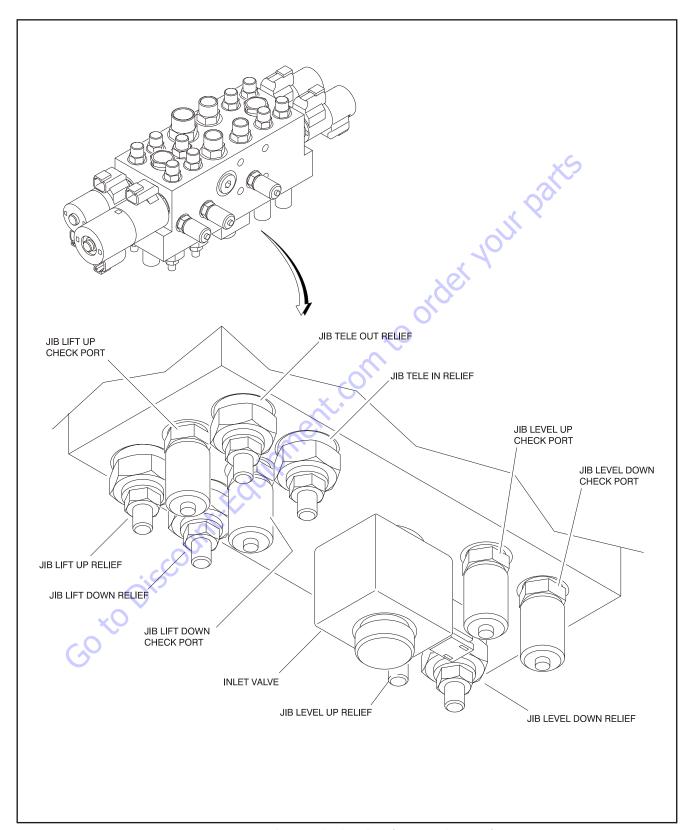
Jib Control Valve Identification - Sheet 2 of 2
